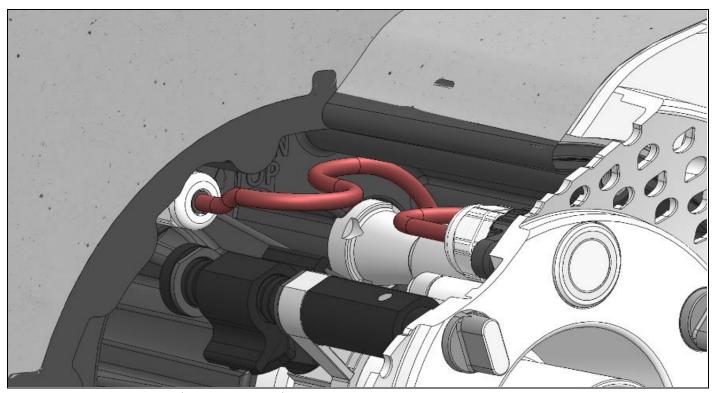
Pulling the cable (sensor button) through the cable screw connector and tighten.
